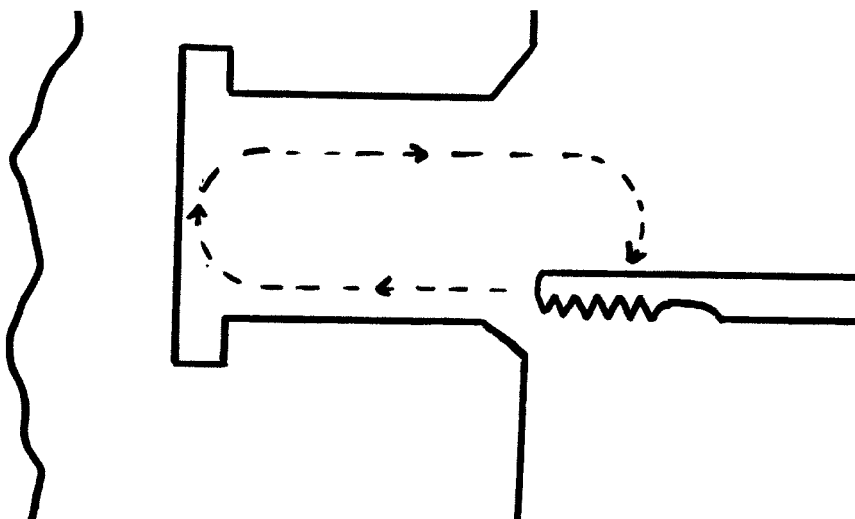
Holder recommends this motion with the inside chaser to cut the threads. The chaser should just cut clean into the recess and must be lifted clear before the chaser end hits the bottom of the hole. This is why it is more difficult to chase threads with fewer teeth per inch. The chaser is moving so much faster it is difficult to lift clear before touching the bottom.
